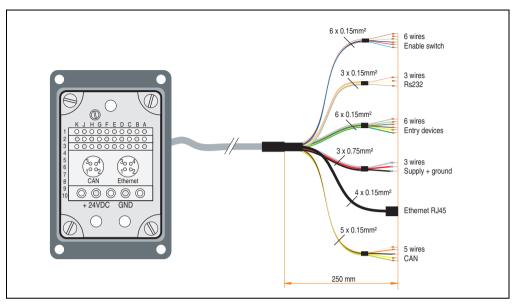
Cable layout - switching cabinet cable 5CAMPC.0020-01
